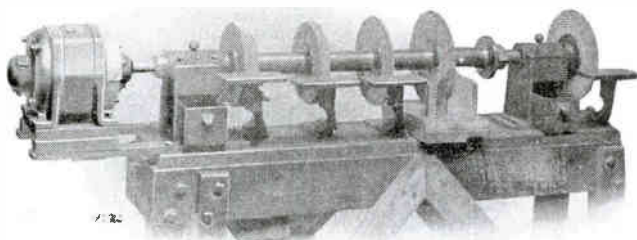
1 H.P. Induction Motor Driving Six-Wheel Grinding Set
